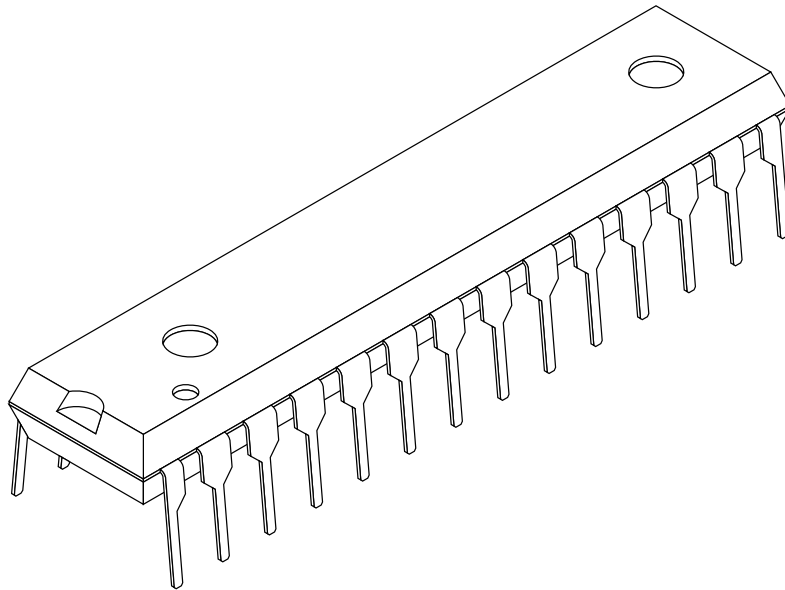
28-Pin 300 mil PDIP Package Dimensions
